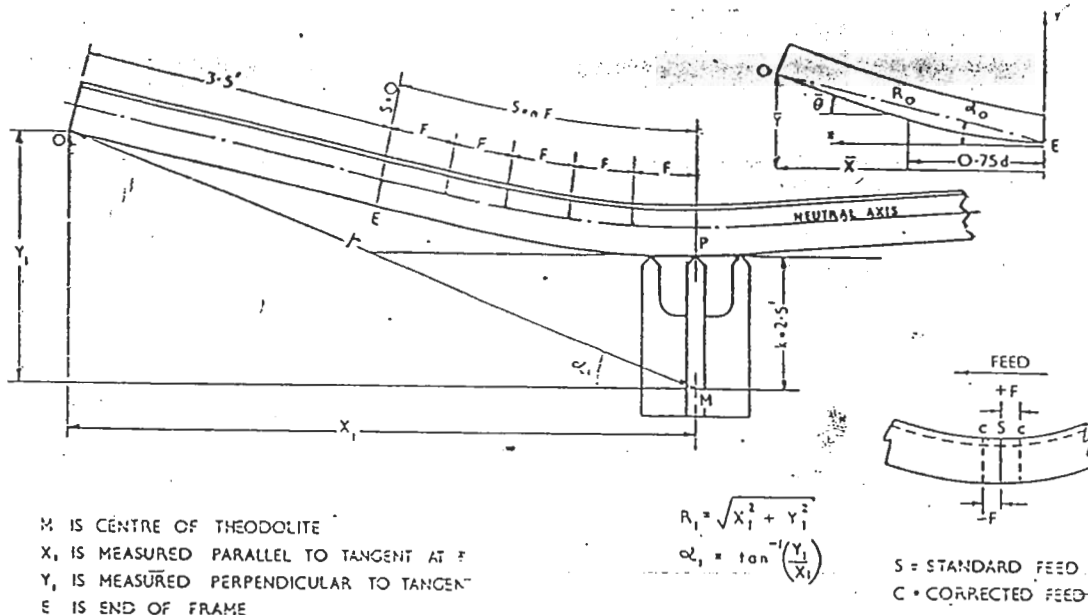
GENERAL ARRANGEMENT OF FULL-SCALE TESTS
